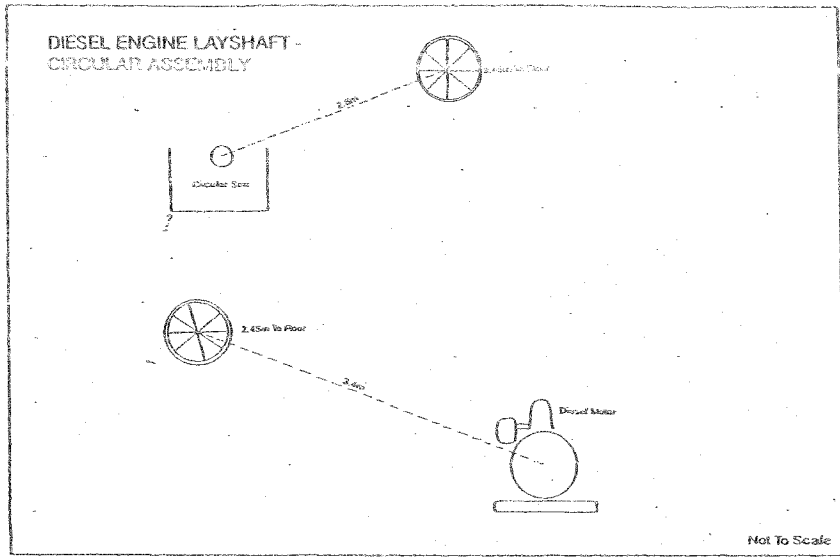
The Machine Shop (E), Machine Layout and Belt Layout
